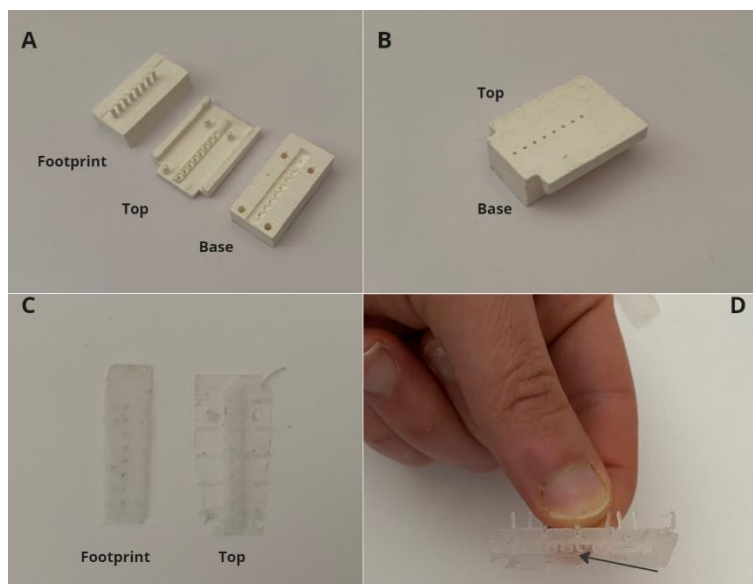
Images of the (A) the moulds, (B) assembly of the top and base part, (C) the cured footprint and top layer with the self-regulating valves, and (D) not forming of the pins.
